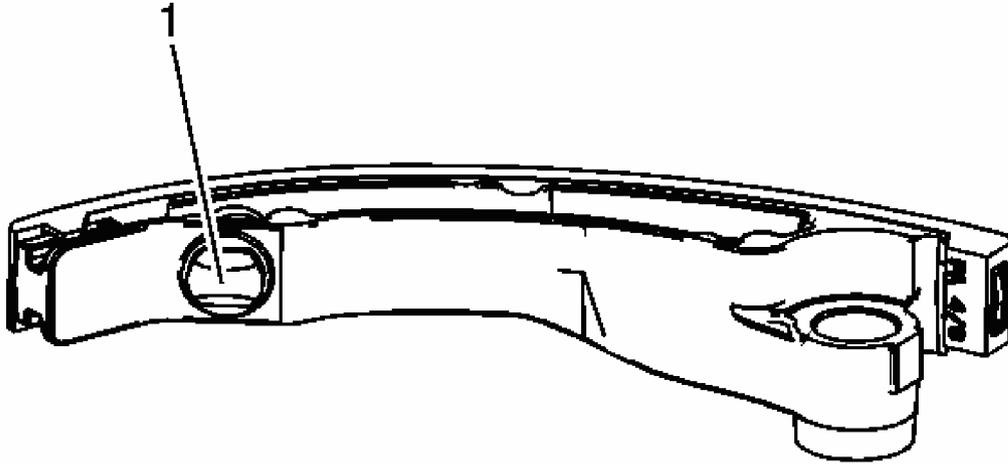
Inspecting Right Secondary Timing Chain Tensioner Contact Pad
